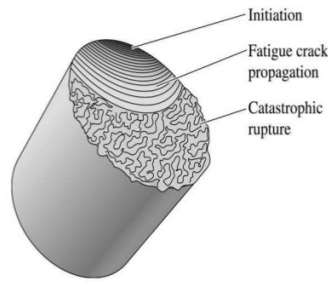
Schematic representation of a fatigue fracture surface in a steel shaft.
